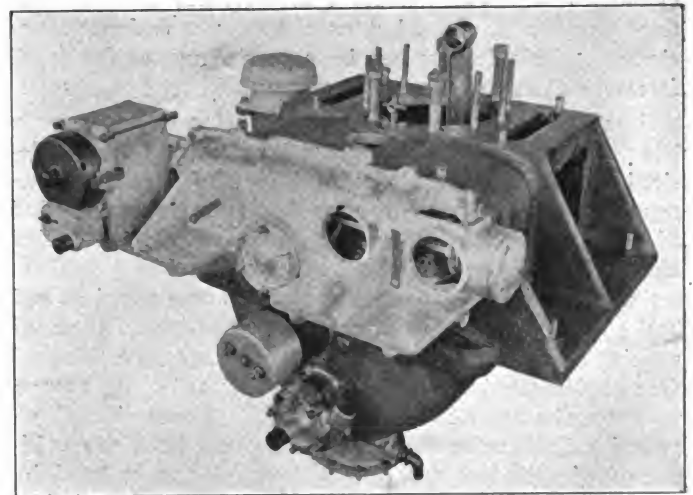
Assembly showing magneto housing, oil pump, water pump and generator
